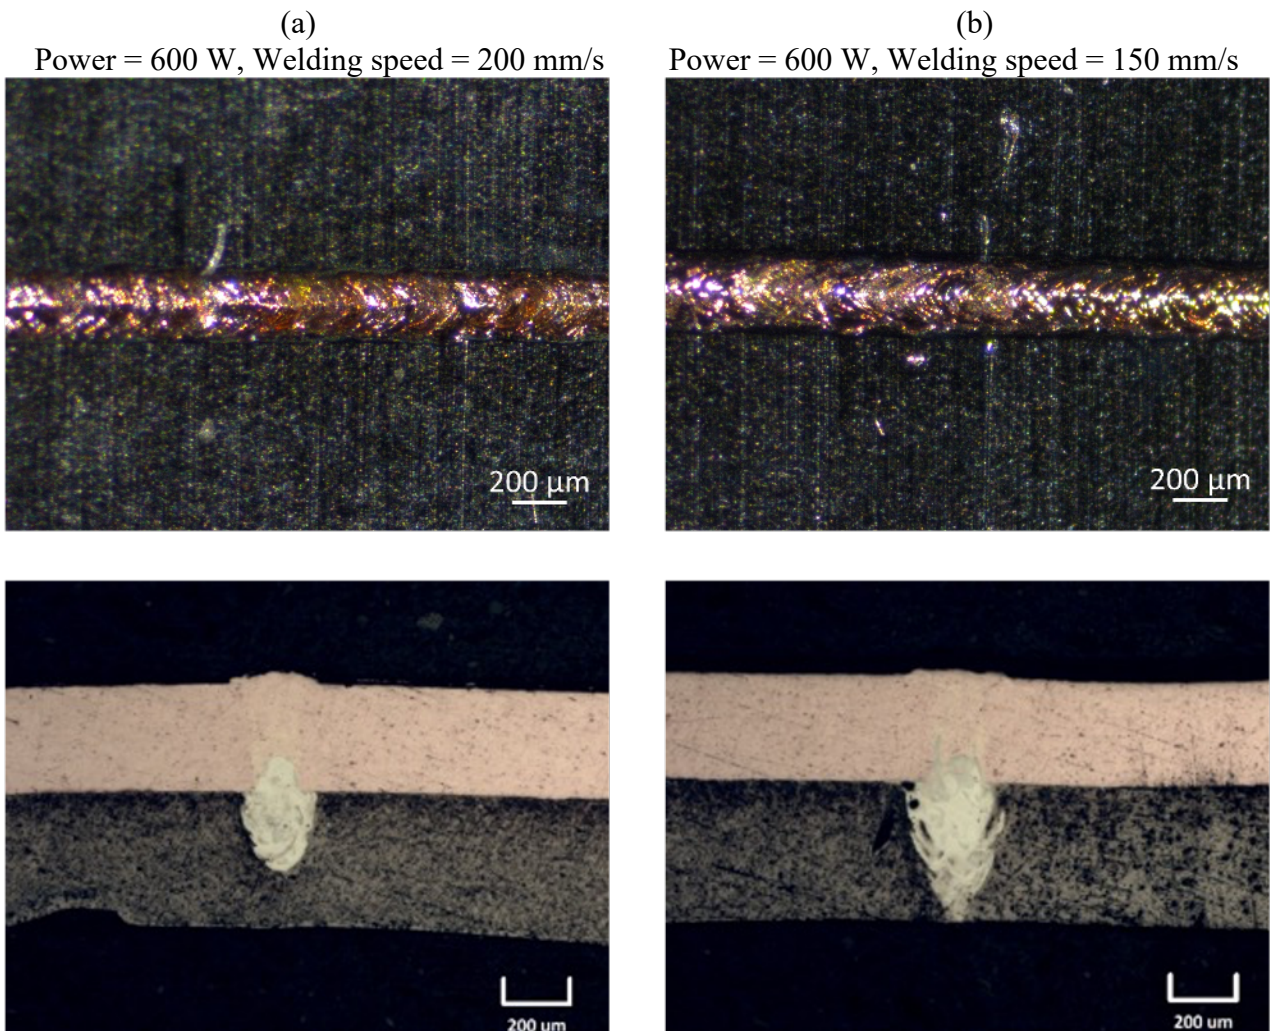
Top and cross sections of welded sample with 163 mm lens[78].
